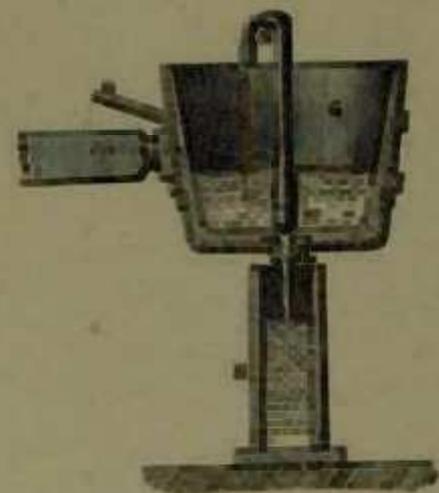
SECTION OF LADLE AND INGOT MOULDS.
